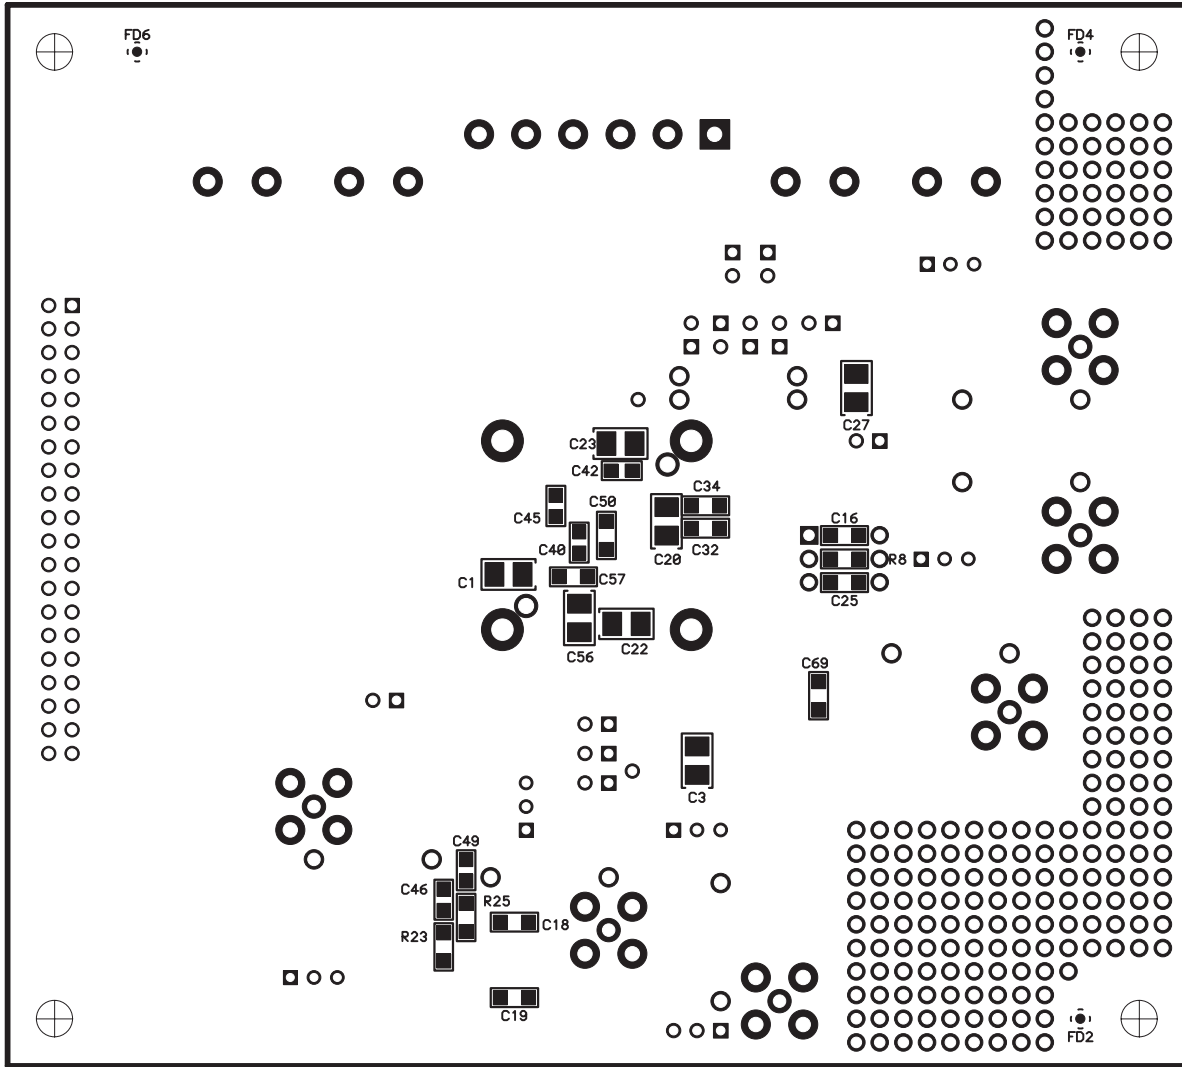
AD9244 Evaluation Board, PCB Assembly, Bottom
